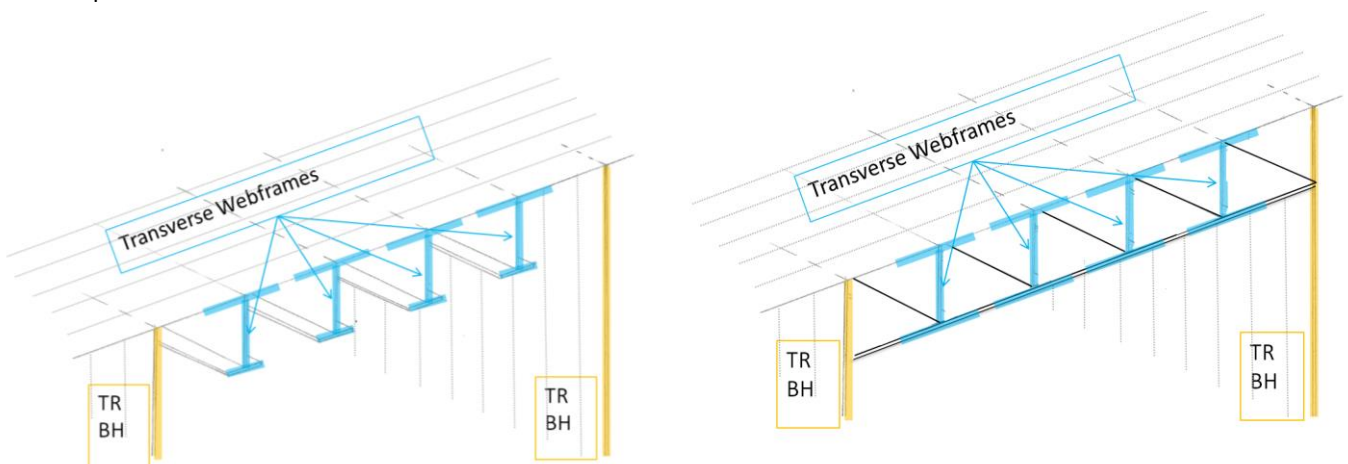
Left the conventional deck beams, right the secondary deck, deck beams (Not the H-541)
